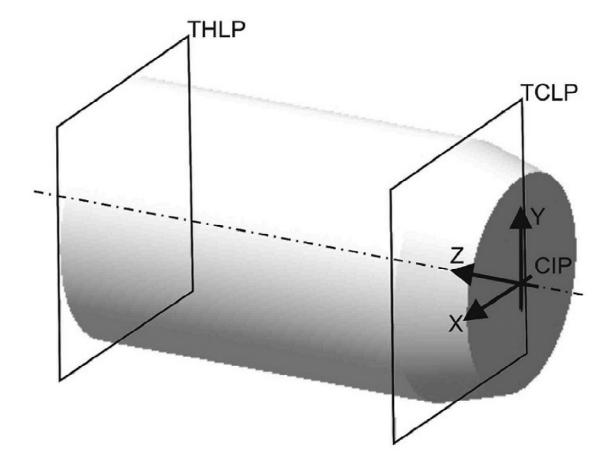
Thread-cutting tap with offset shank — Revolved body of cutting part
